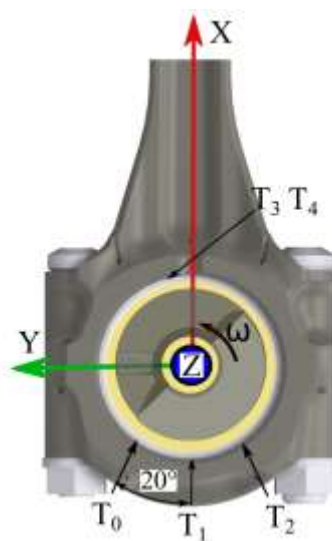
Kawasaki ZX10 right connecting rod thermocouple location
